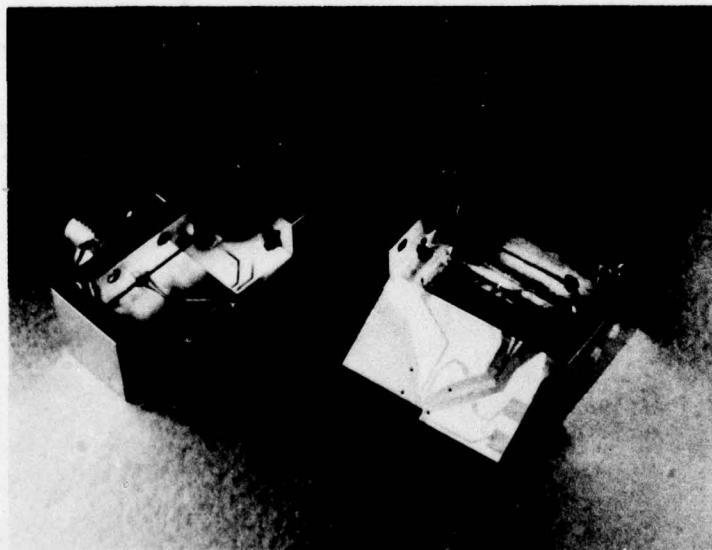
Demodulator Test Fixture and Substrate Assembly
